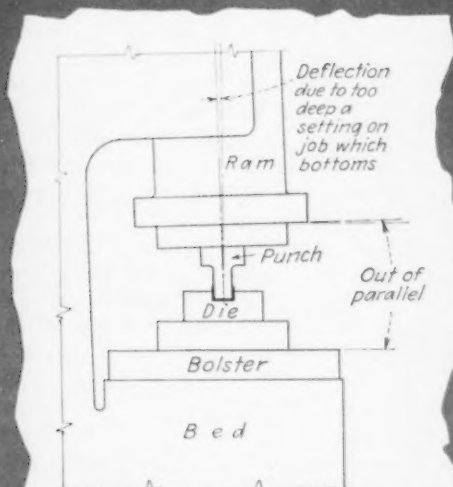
Too deep a ram setting on jobs that bottom cause press frame deflection since the metal through the die and punching between the ram and bolster is incompressible. Excessive deflection may result in a sprung press frame or even breakage of the frame or die.
